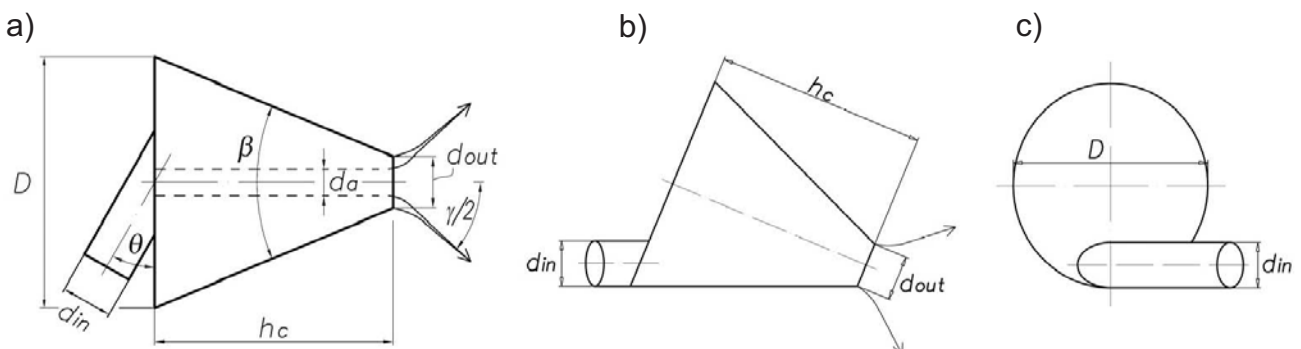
Conical vortex valve: a) top view b) end view c) front view.
